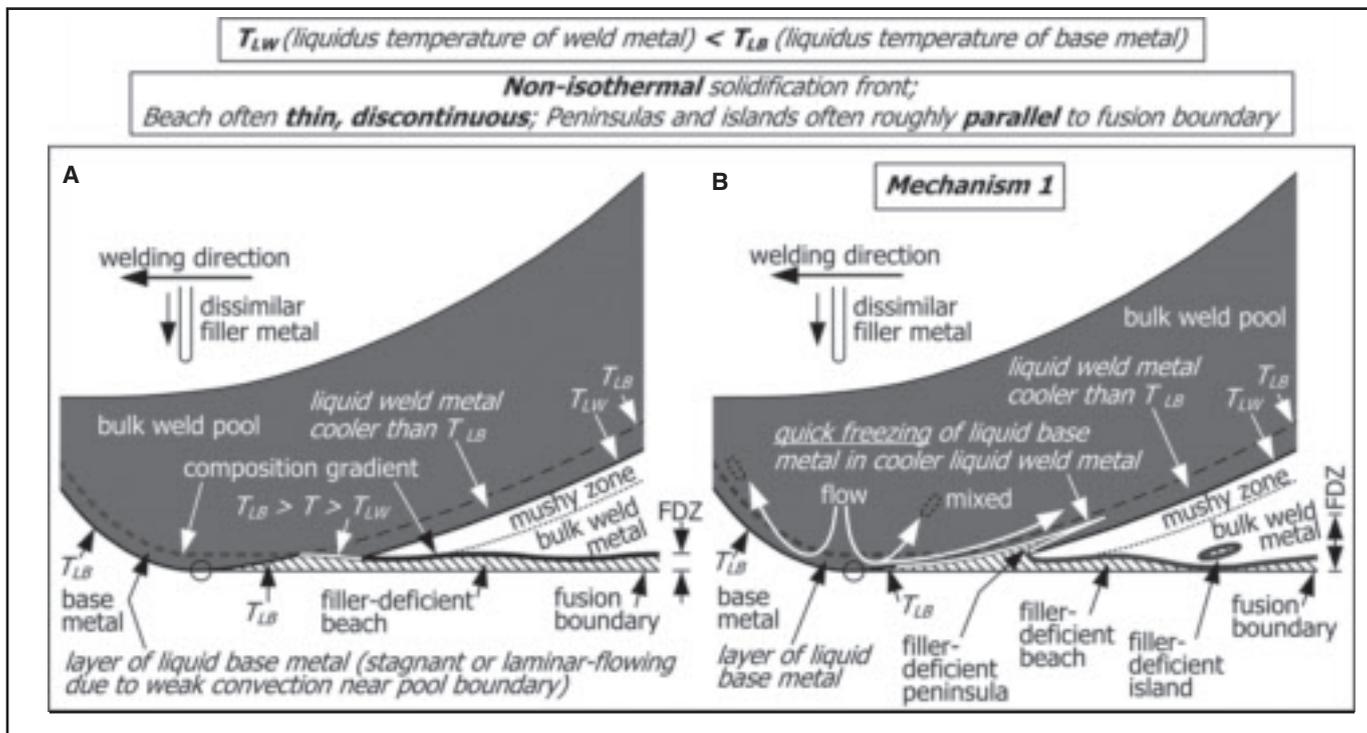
Formation of fusion-boundary macrosegregation (filler-deficient zone FDZ) when filler metal makes $T_{LW} < T_{LB}$: A — beach; B — beach, peninsula, and island by Mechanism 1. Pool boundary is melting front before circle and solidification front after.
